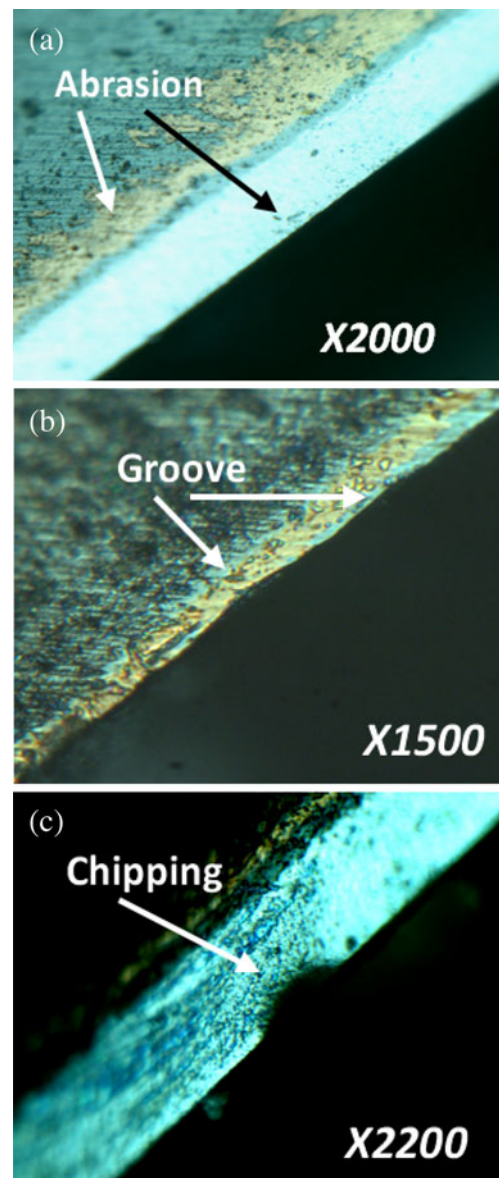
Tools wear at a flank, b cutting edge, and c chipping of cutting edge
